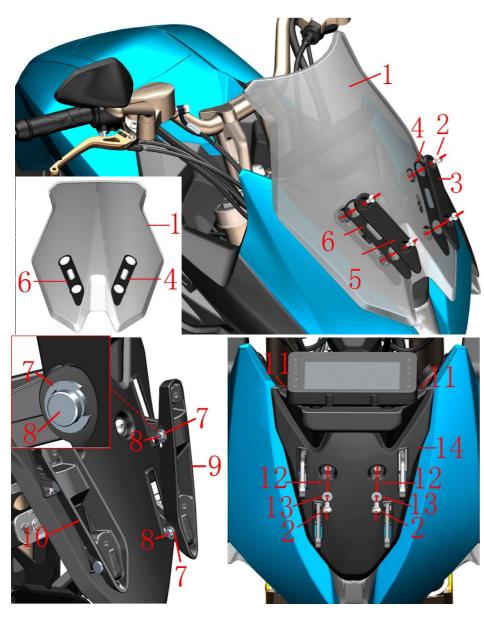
F	RONT FORK	Windshield assembly	СНК
